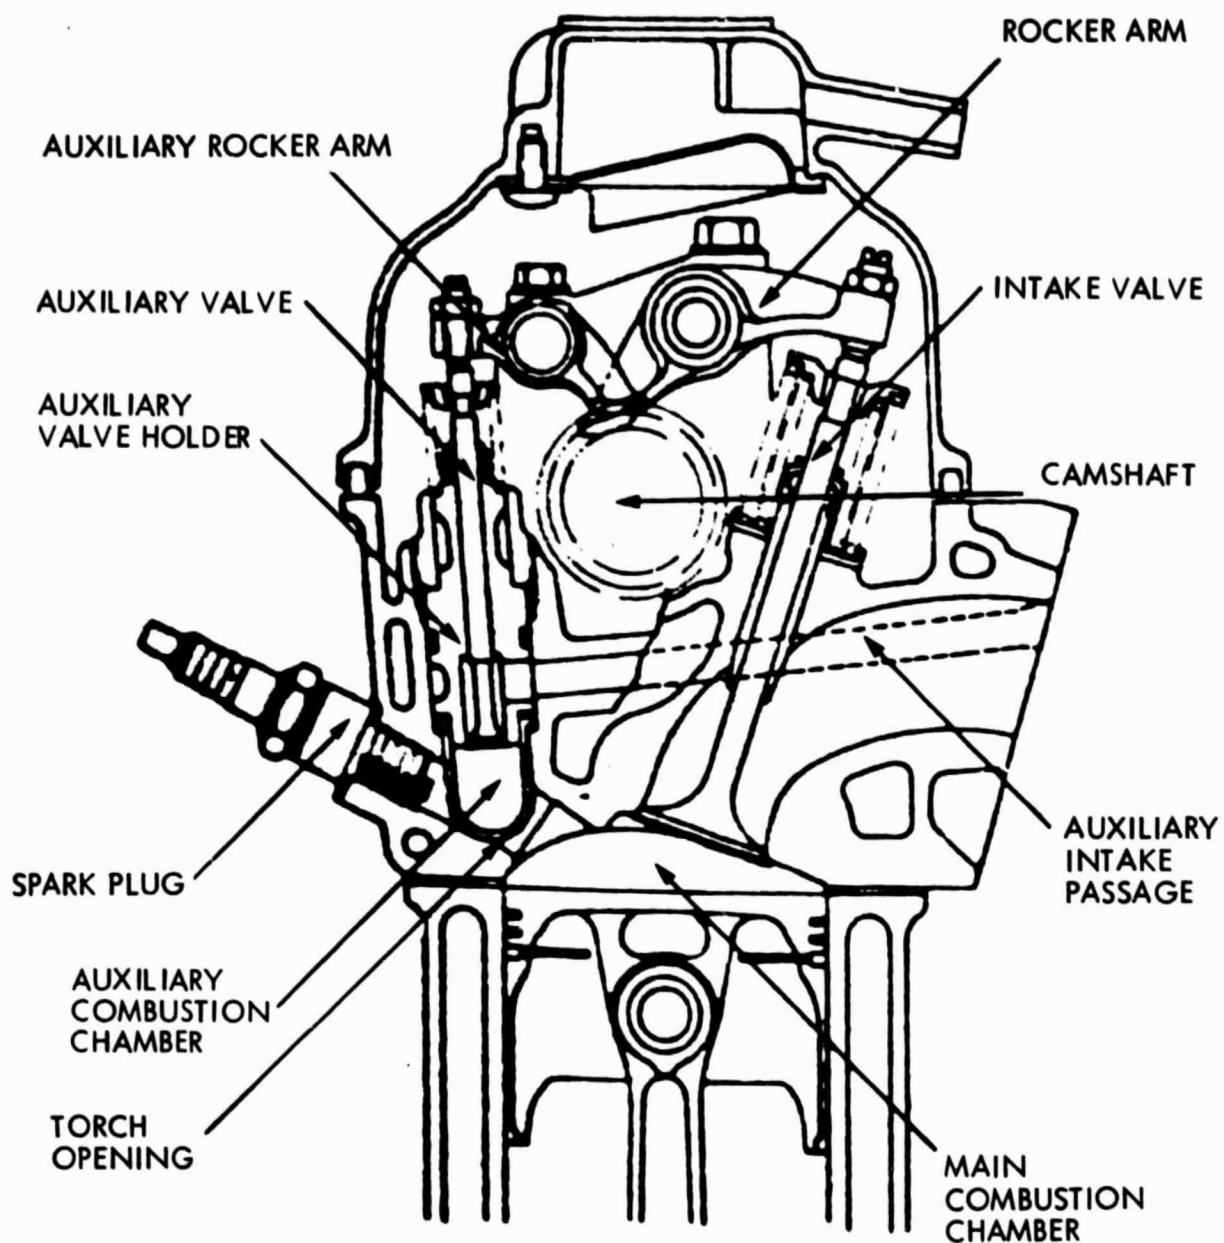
CVCC Engine Cylinder Head, Cutaway View
